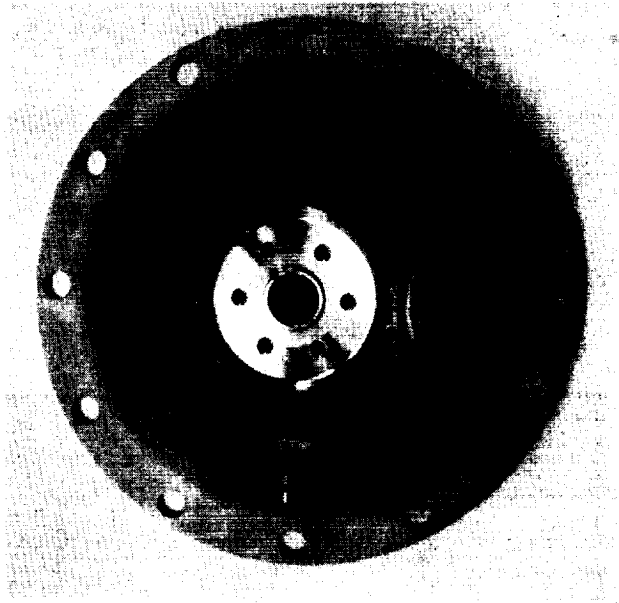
72-Element Injector Manifolding Before Face Plate Bonding
